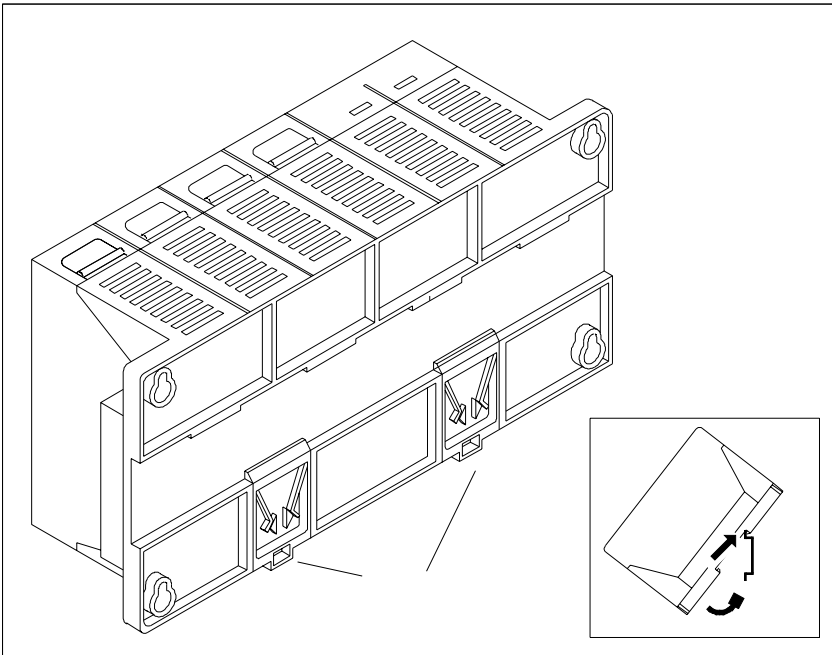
ADAM-5510/P31 panel mounting screw placement
